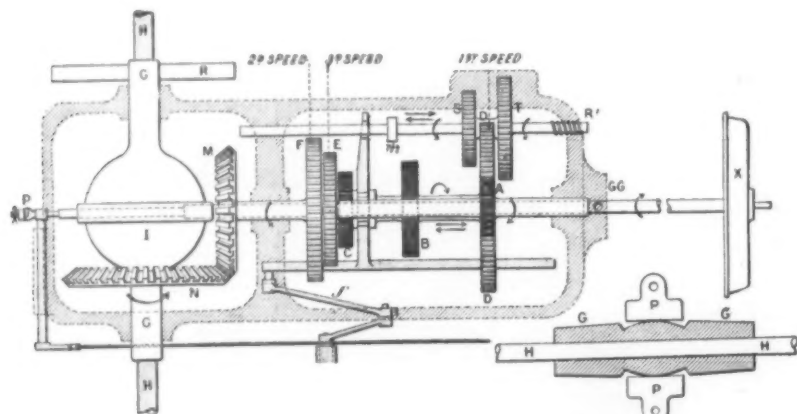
DIAGRAM OF CHANGE GEAR BOX.
